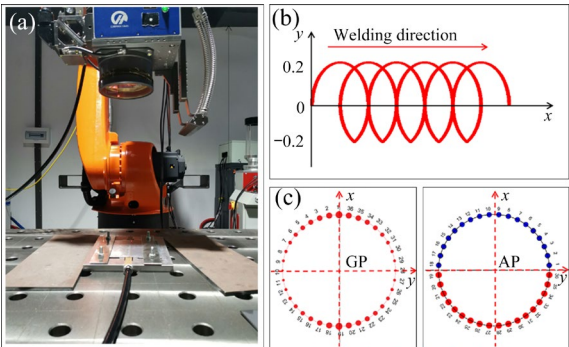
Schematic diagrams of experimental device: (a) Welding equipment and fixture; (b) Scanning trajectory; (c) GP and AP mode power settings
